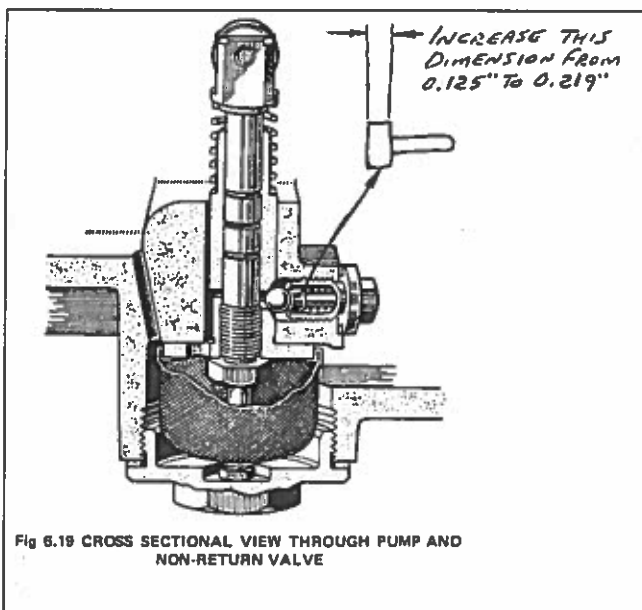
CROSS SECTIONAL VIEW THROUGH PUMP AND NON-RETURN VALVE
